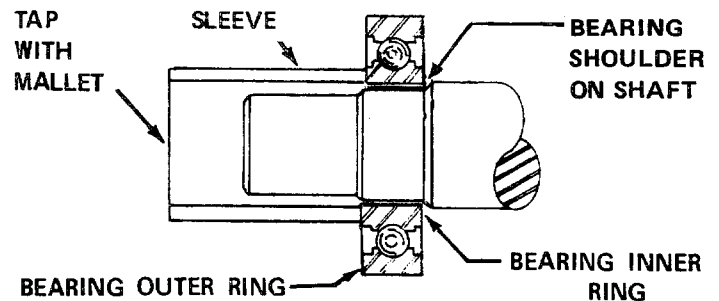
INSTALLING BEARING ON GENERATOR SHAFT.
